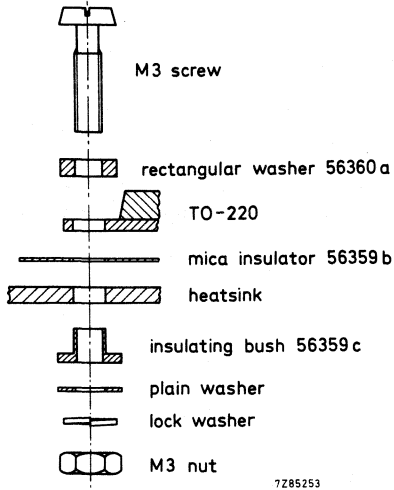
Insulated screw mounting with rectangular washer. Known as a "bottom mounting".
